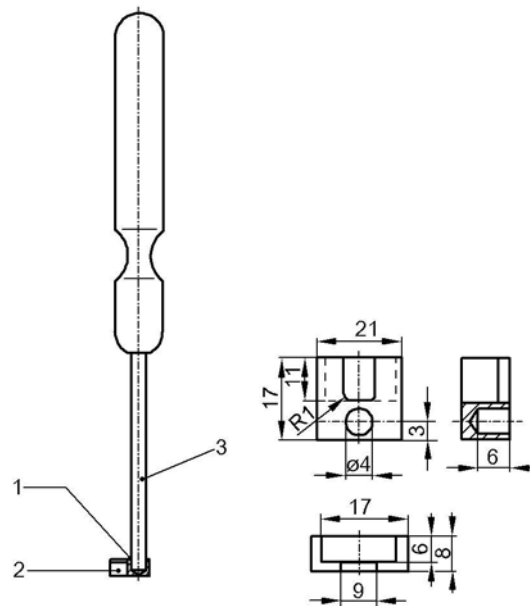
Tool for inserting the cable plugs at the solenoid coils
